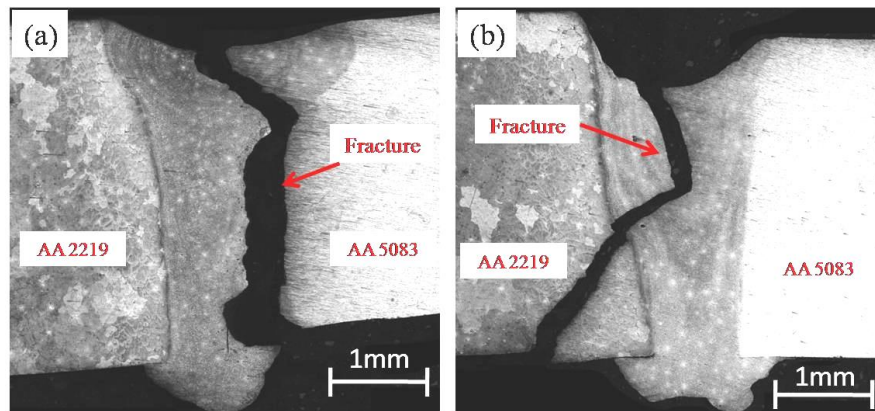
Optical macrograph of fractured tensile test specimens of (a) weld that has highest breaking load (b) weld that has lowest breaking load
